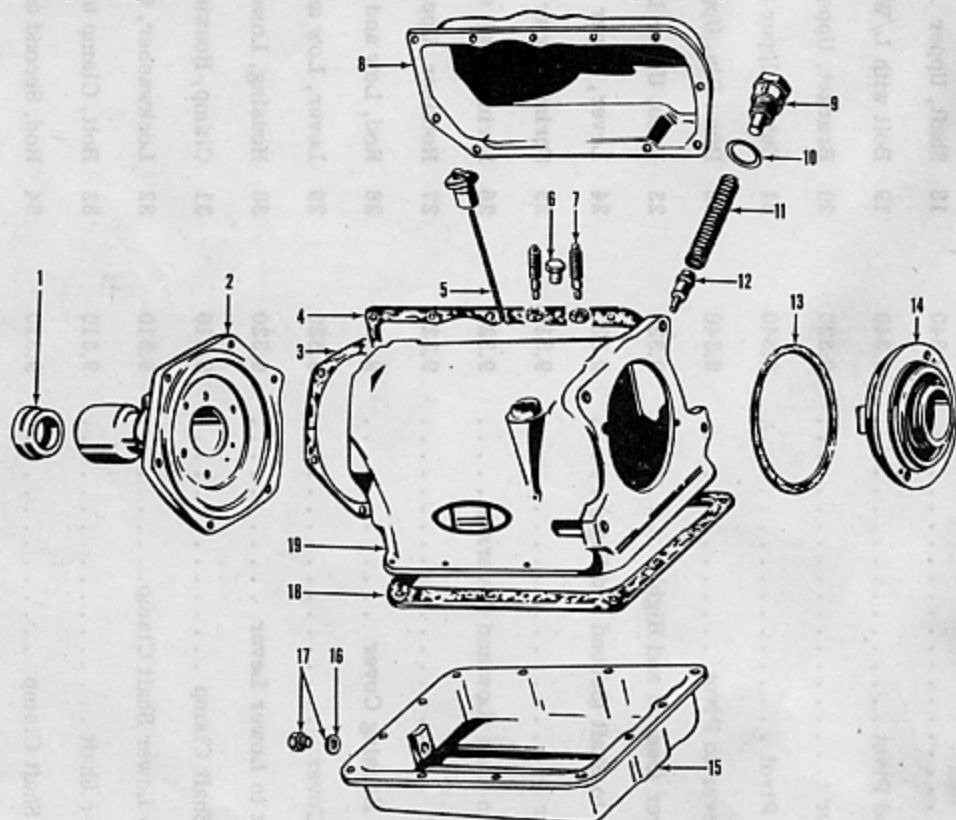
CASE, COVERS AND REAR BEARING RETAINER - HYDRA-MATIC
